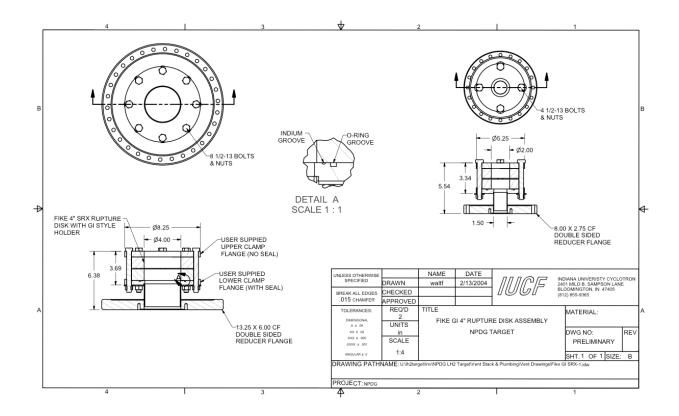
Figure XXX: design for the seals for the burst disks. The design incorporates an indium groove inside of the o-ring groove so that there is no diffusion of helium gas from the vent stack into the main vacuum system. This design produces no mechanical modification to the burst disks themselves, whose quality assurance procedures are therefore identical to those for standard components.
